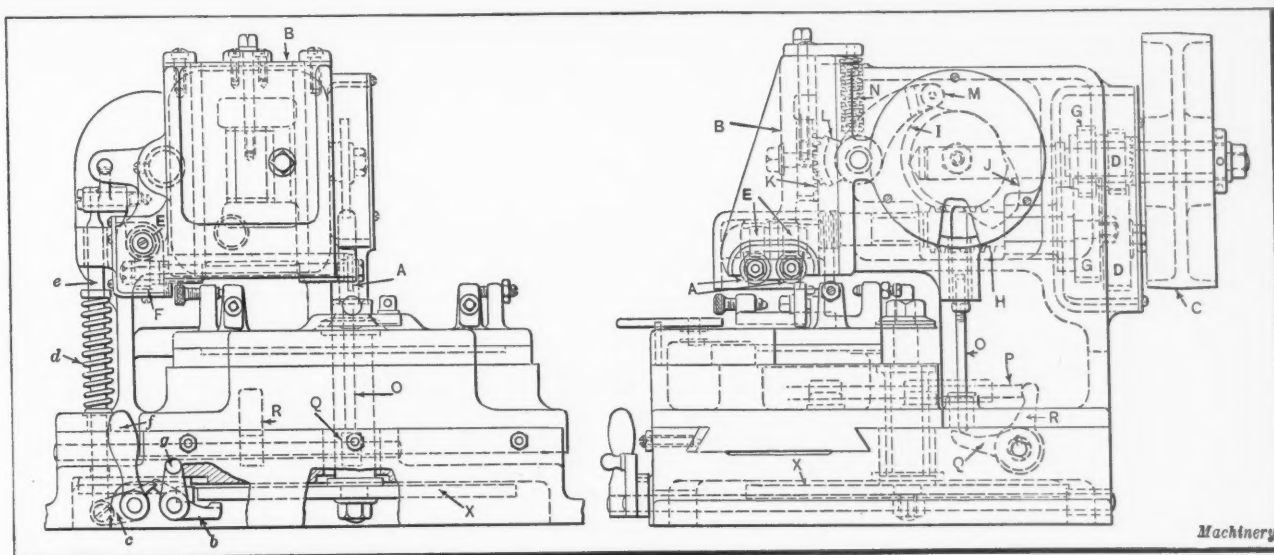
Assembly Views of the Type-bar Segment Slot Milling Machine illustrated in Fig. 1
